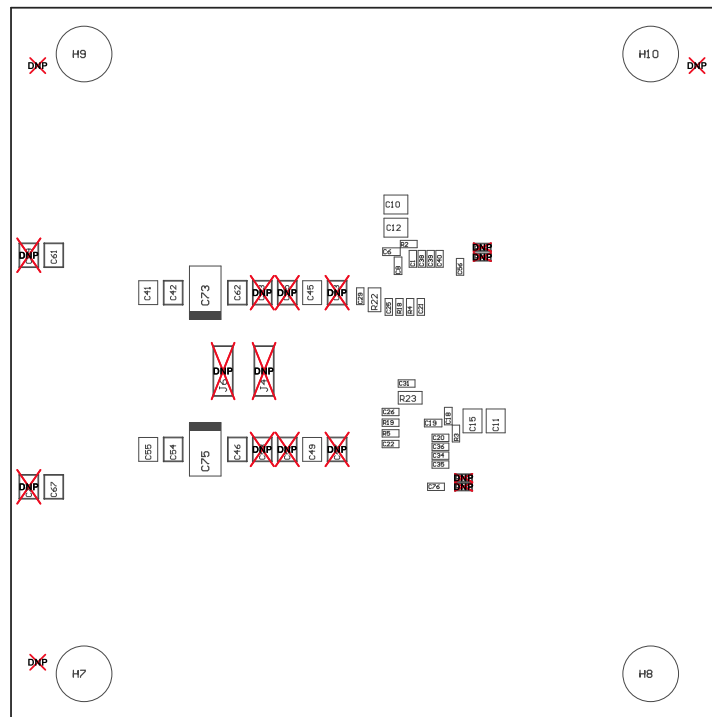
TPS546C20AEVM1-746 EVM Bottom Assembly Drawing (Bottom View)
